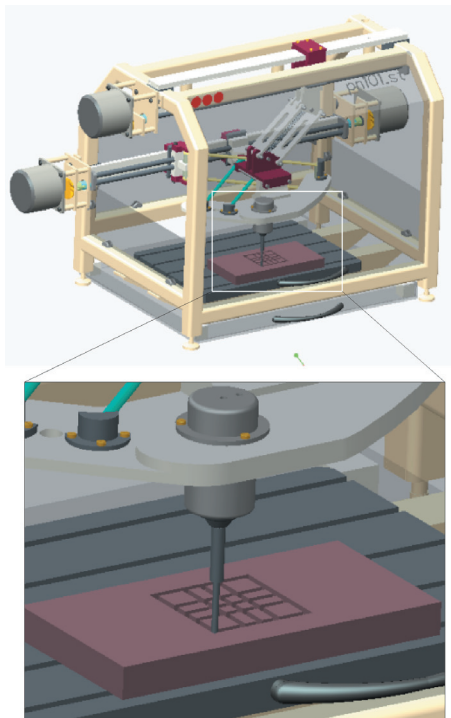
Machining simulation in the CAD/CAM system - pn101\_st V1.5
